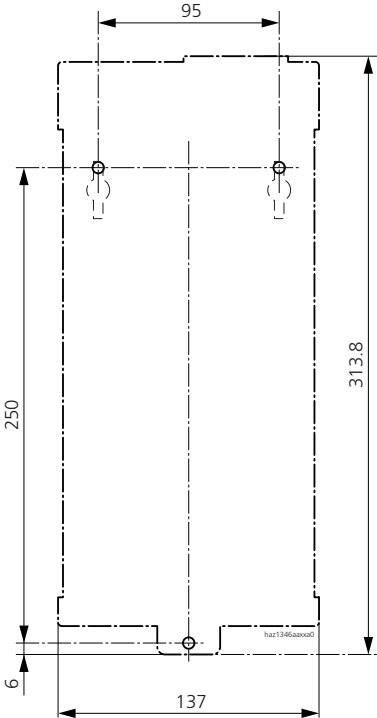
Dimensional drawing for wall-mounting the ATPS
